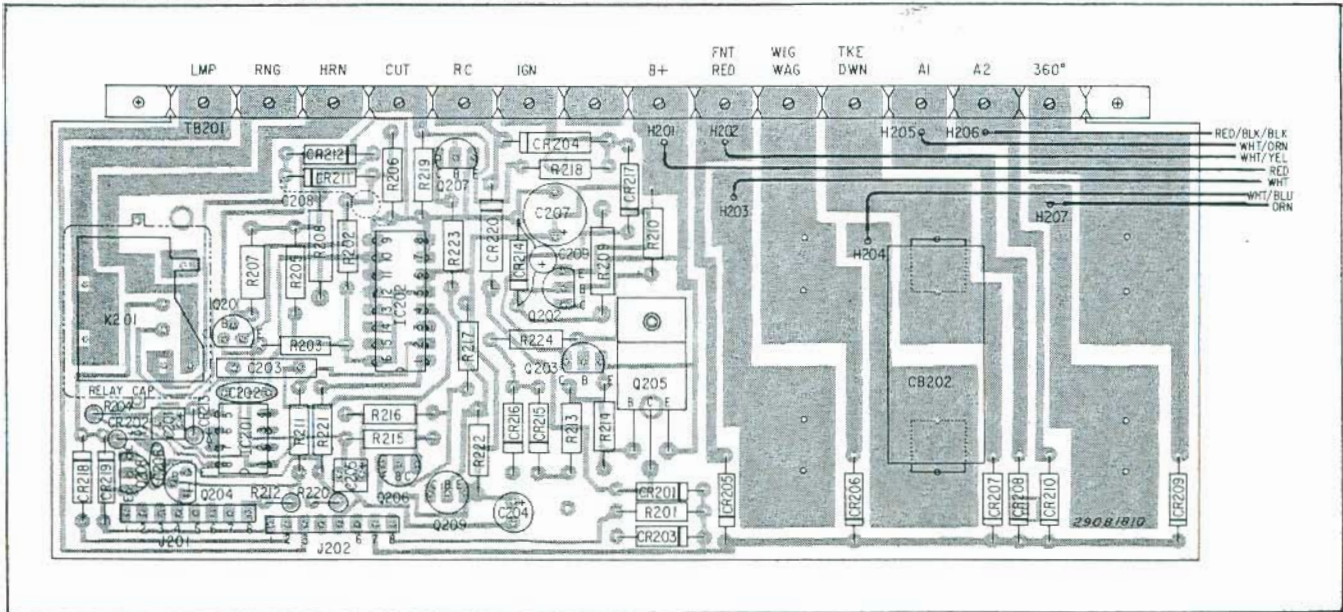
B. Model CC1 Board Assembly Control Module Parts Location Diagram (for units with FLA label on TB1).
